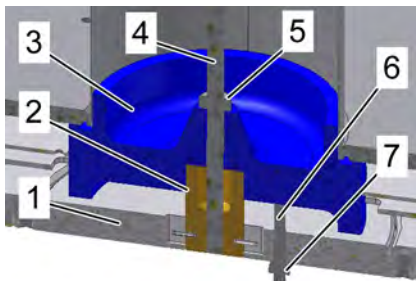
Disassembling the Nitrogen Tube - step 3
